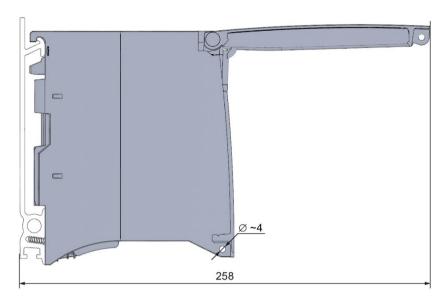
Dimensional drawing of the CPU 1516T-3 PN/DP, side view with open front panel
